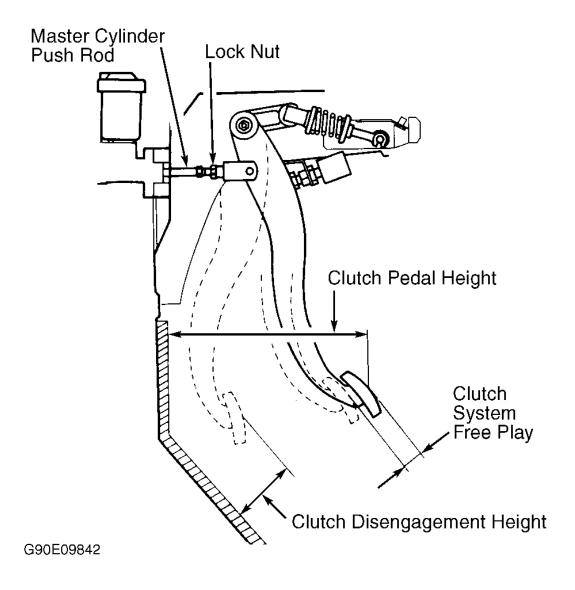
Adjusting Clutch Pedal (Miata) Courtesy of MAZDA MOTORS CORP.
